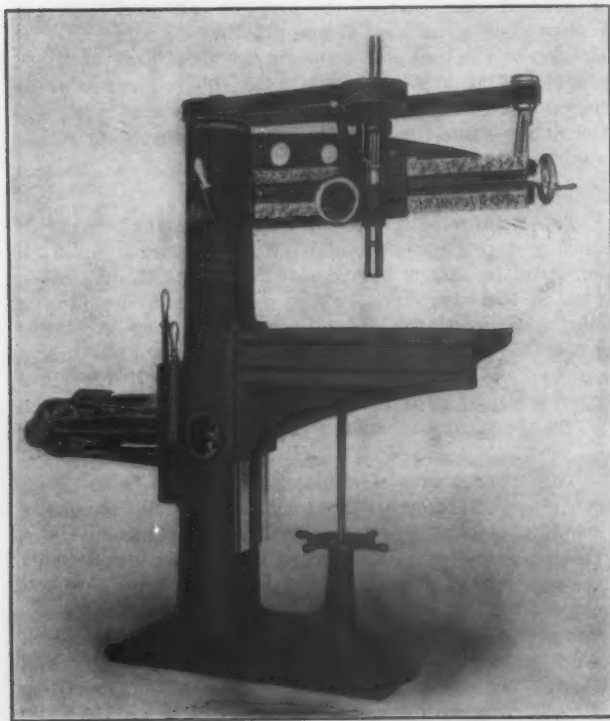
The New 30-In. High Speed Radial Drill Built by the Midland Machine Company, Detroit, Mich.
